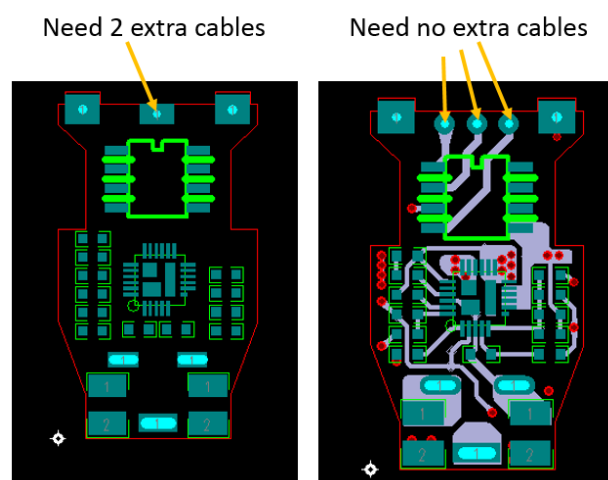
Former developed PCB board (Left) and new PCB board (Right)
